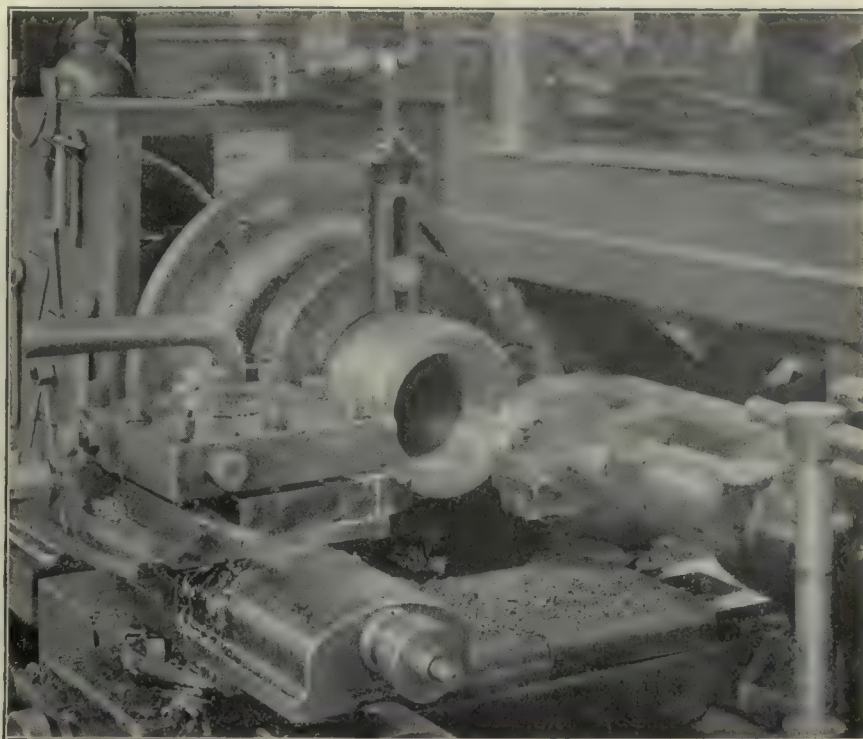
THREADING THE BASE IN A LE BLOND LATHE, OPERATION 9
